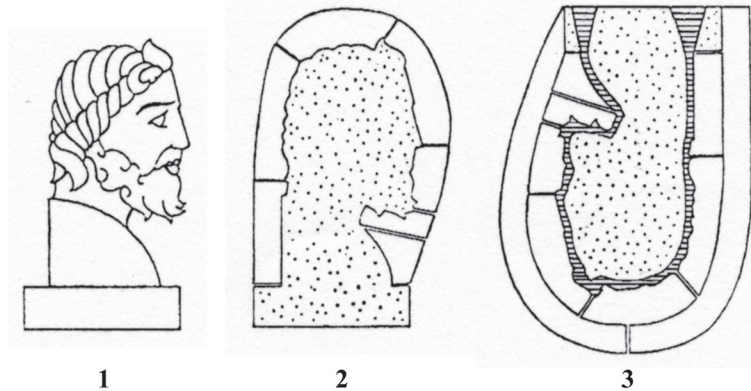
Piece Mould Casting. 1) model 2) clay mould pieces pressed onto the model surface 3) model is removed, core inserted, clay mould section re-assembled and fastened together, then bronze poured into the funnel opening. (Fig. 2, p. 10, Steinberg 1967)
